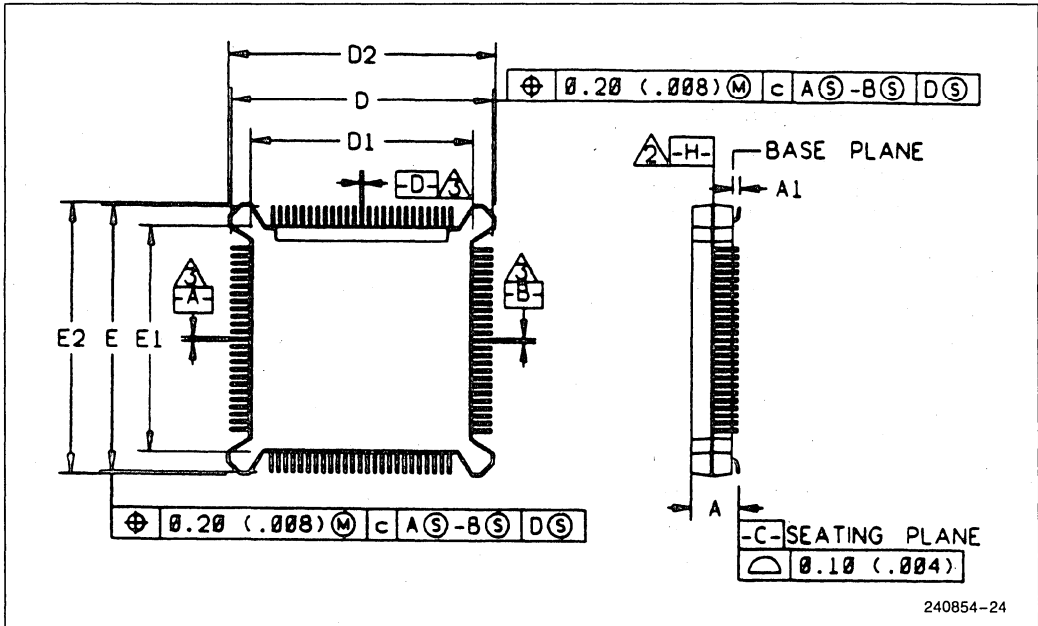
Principal Dimensions of the 82750PB in the 132-Lead PQFP Package
